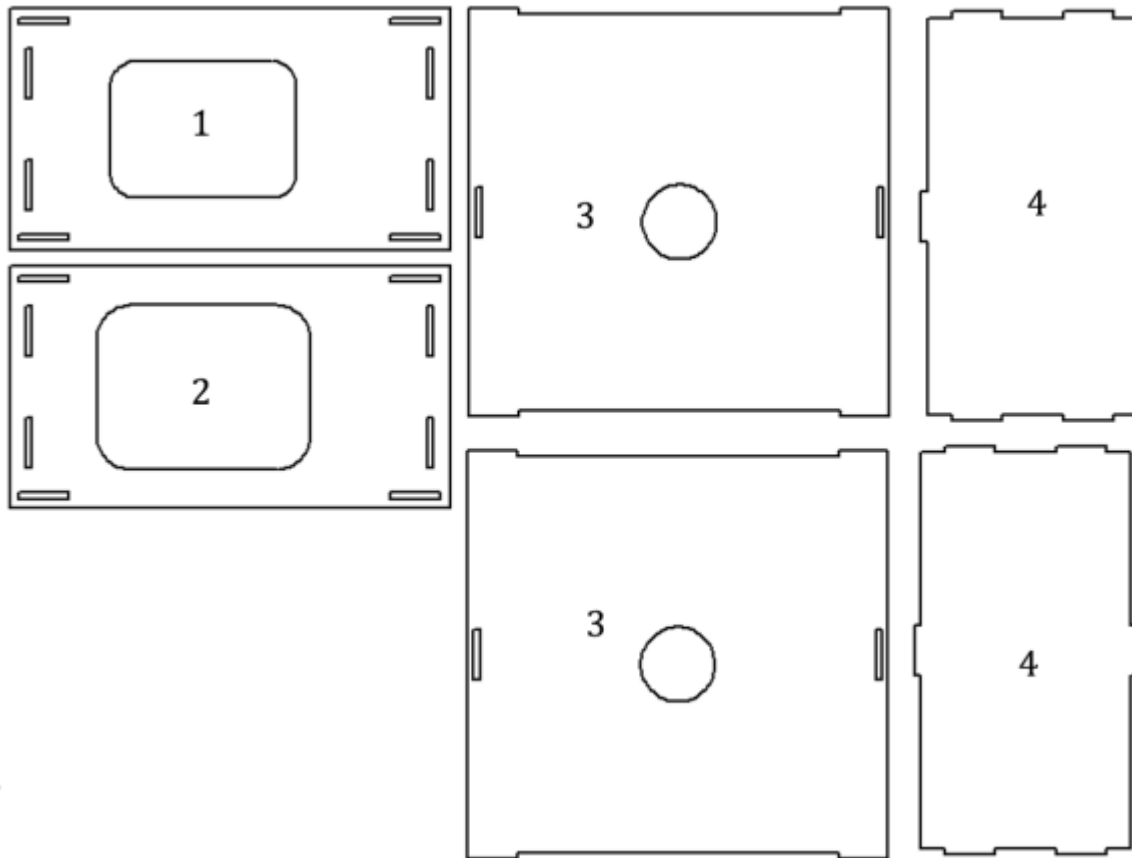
The laser-cut acrylic faces used to make our case. Piece 1 is the bottom, piece 2 is the top, pieces 3 are the two large side faces through which the bearings are attached and the axle goes through, and pieces 4 are the two small side faces.
